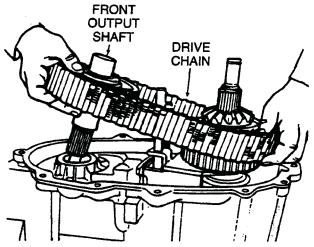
Remove Front Output Shaft and Drive Chain
